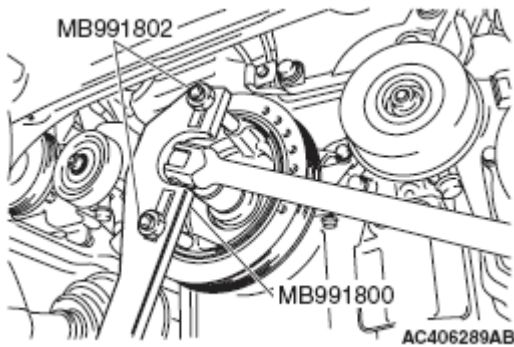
Tightening Crankshaft Pulley Bolt Using Special Tools MB991800 And MB991802
